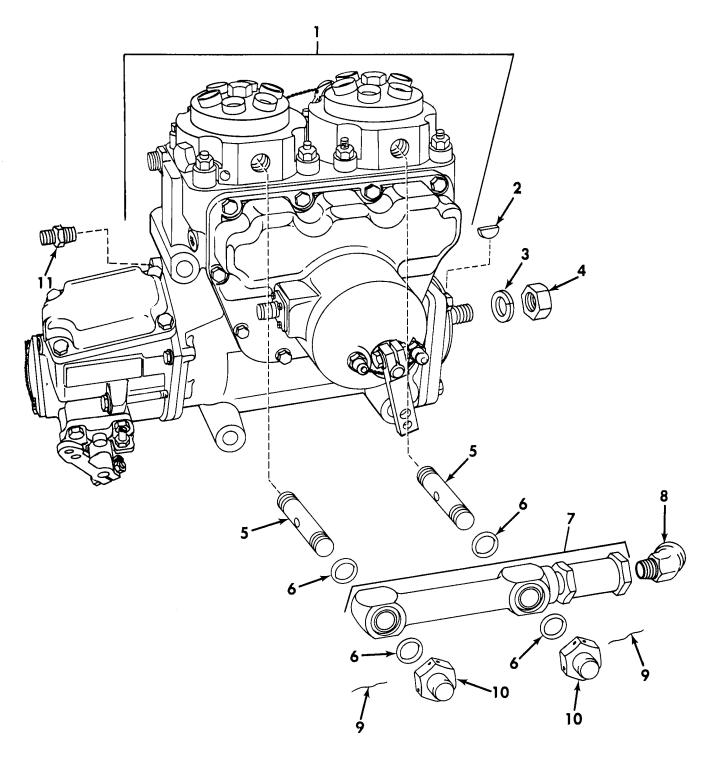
Bleeder Housing, Valve Assembly, and Associated Parts.
